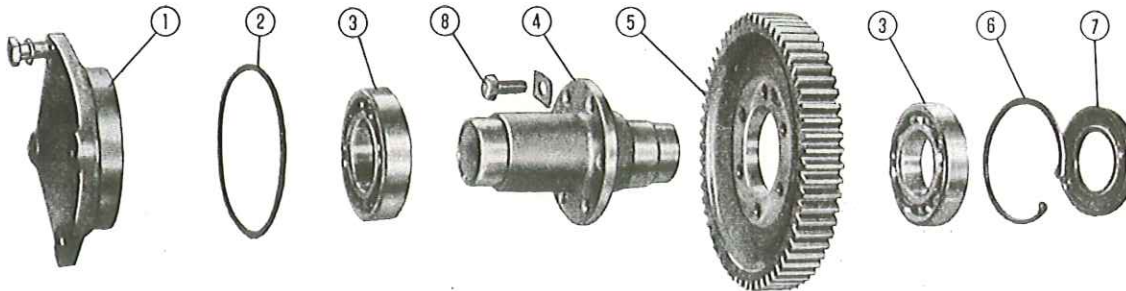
Exploded view of P.T.-O. front driving gear assembly (located in the lower compartment of the clutch housing).
